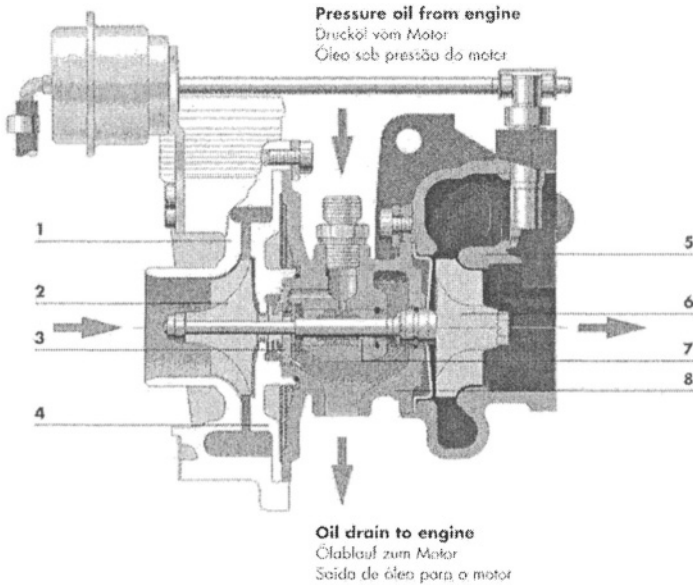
A turbocharger for passenger cars (Source: BorgWarner Turbo Systems): 1. Compressor housing, 2. compressor wheel, 3. thrust bearing, 4. compressor backplate, 5. turbine housing, 6. shaft & turbine wheel assembly, 7. bearing bushing, 8. centre housing.
